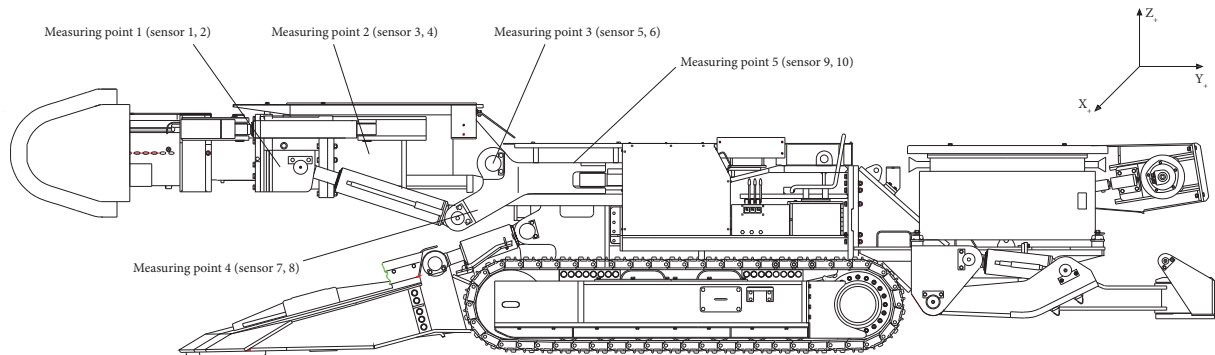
Arrangement drawings of roadheader's measuring point.
